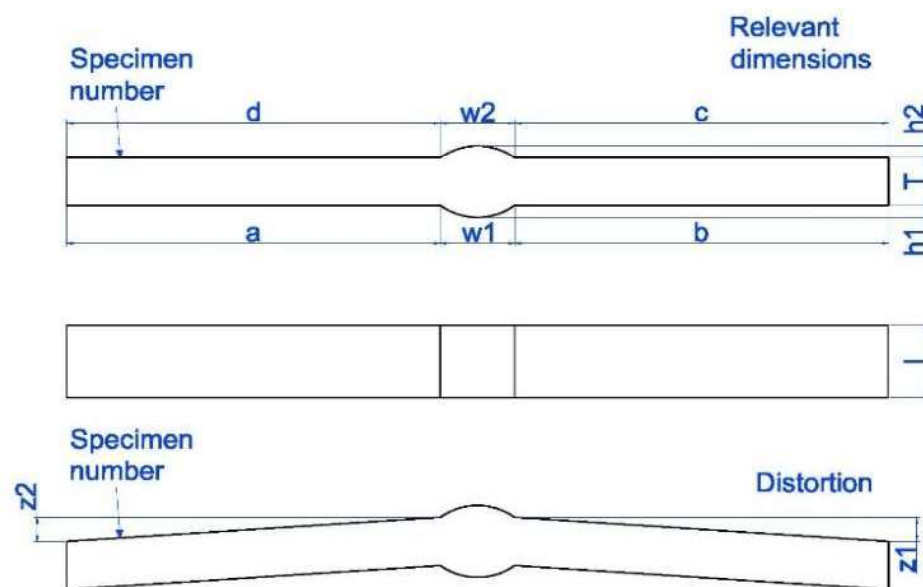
GEOMETRIC RAPPRESENTAZION OF WELDED JOINTS' SAMPLE AND MISALIGNMET
